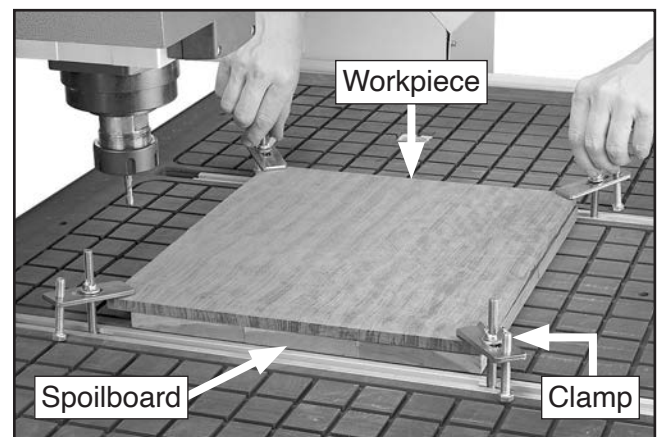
Example of spoilboard and workpiece clamped to CNC router table.
